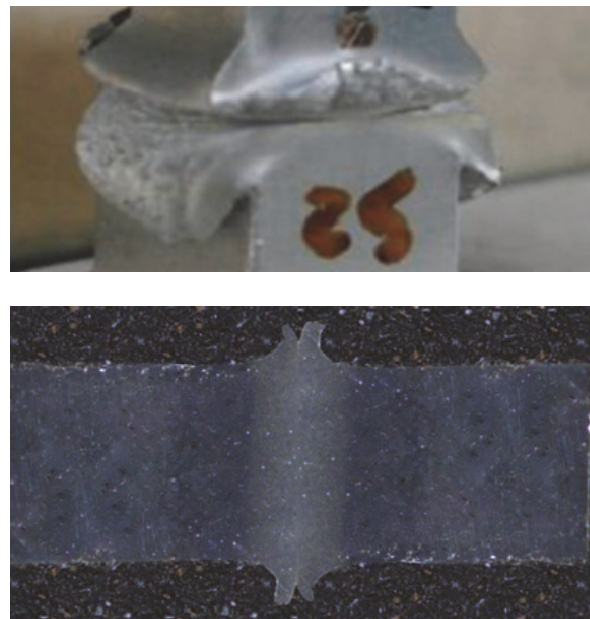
LFWed AA6082-T6 joint and macrograph of the weld section
